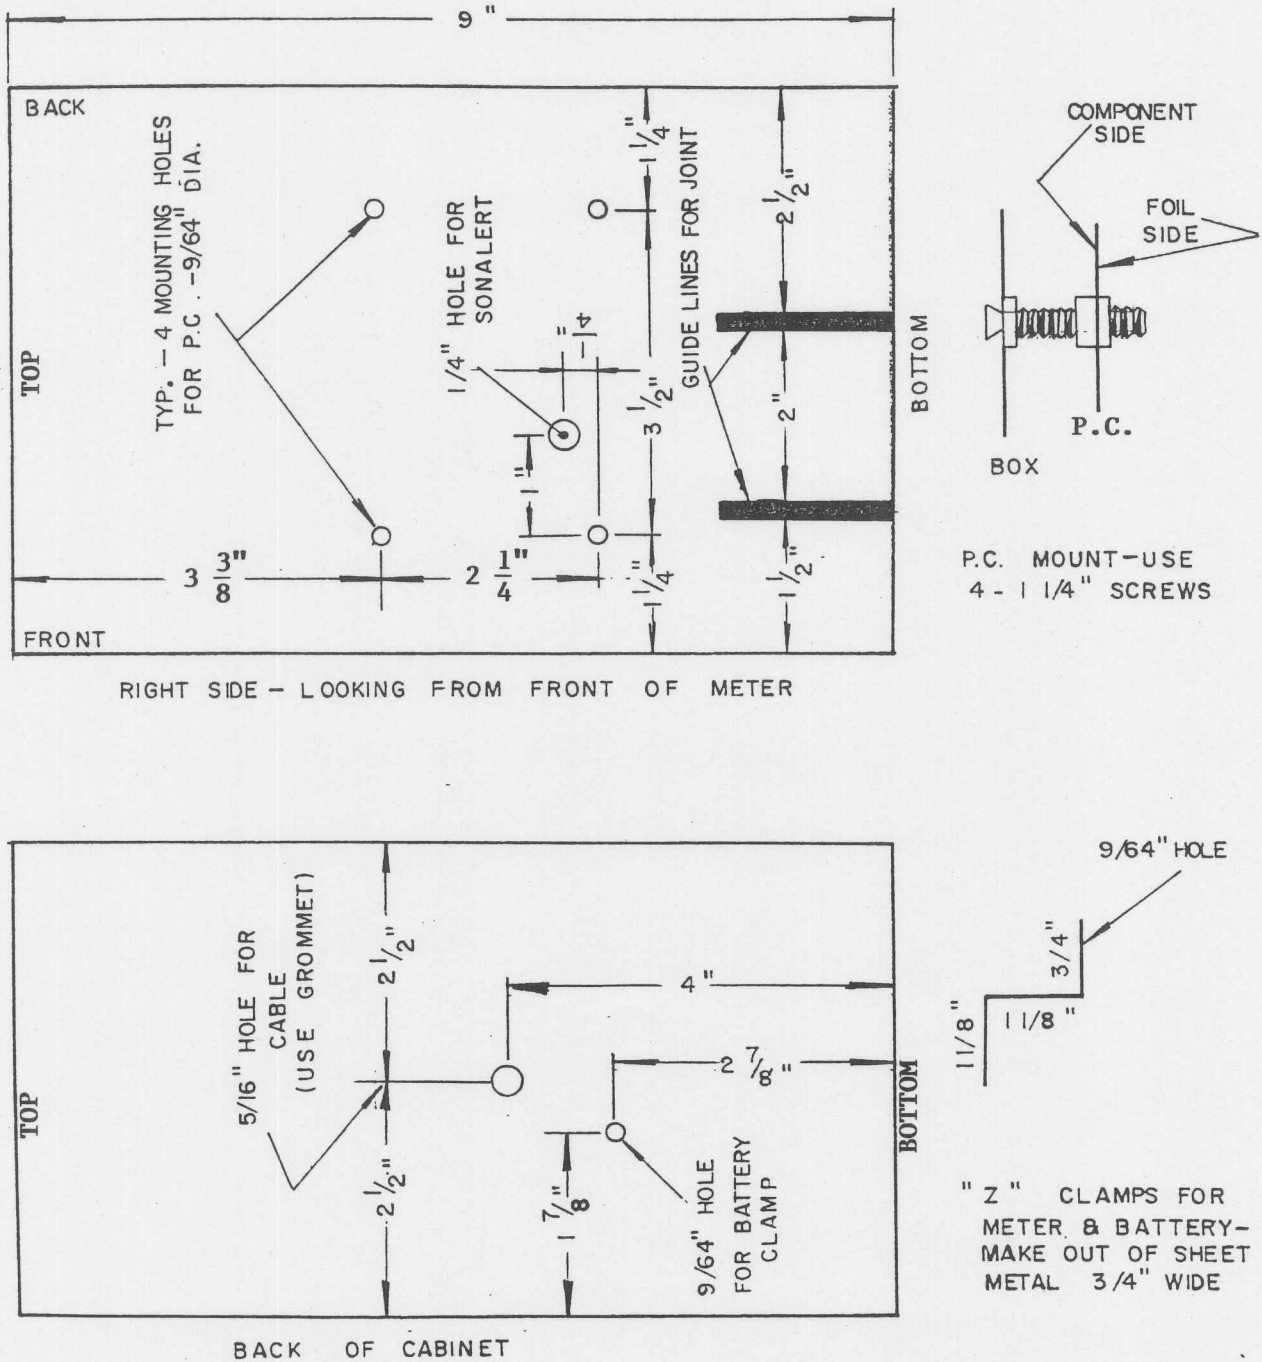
Drawing I-FM, Back and Side View of Electronics Cabinet (5" x 6" x 9")
